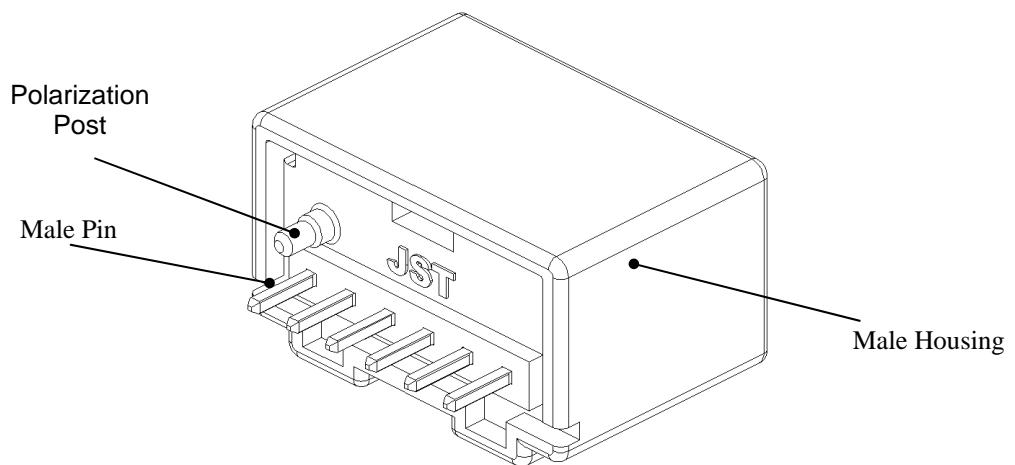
Male Housing Assembly with Polarization Post (e.g. 6 position)
